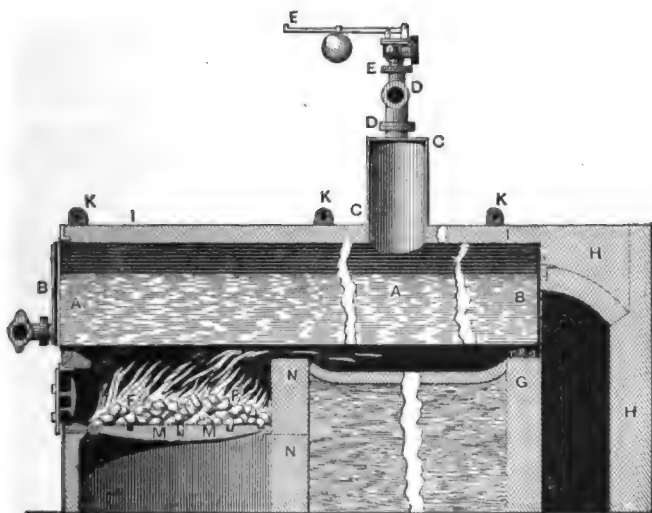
SECTION OF CYLINDRICAL BOILER.
